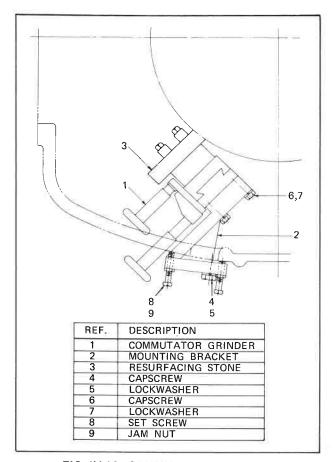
COMMUTATOR GRINDER PART 8837582G1.
